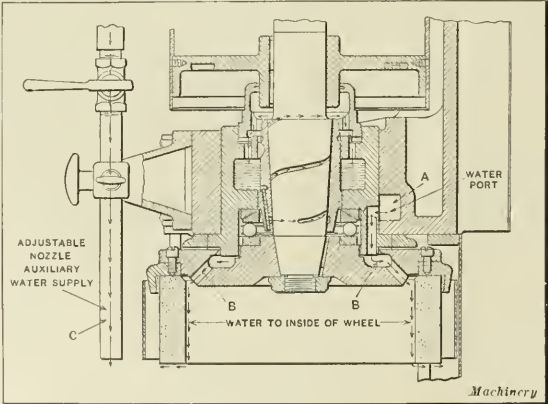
Means provided for delivering Coolant to Surface Grinder made by Blanchard Machine Co.
